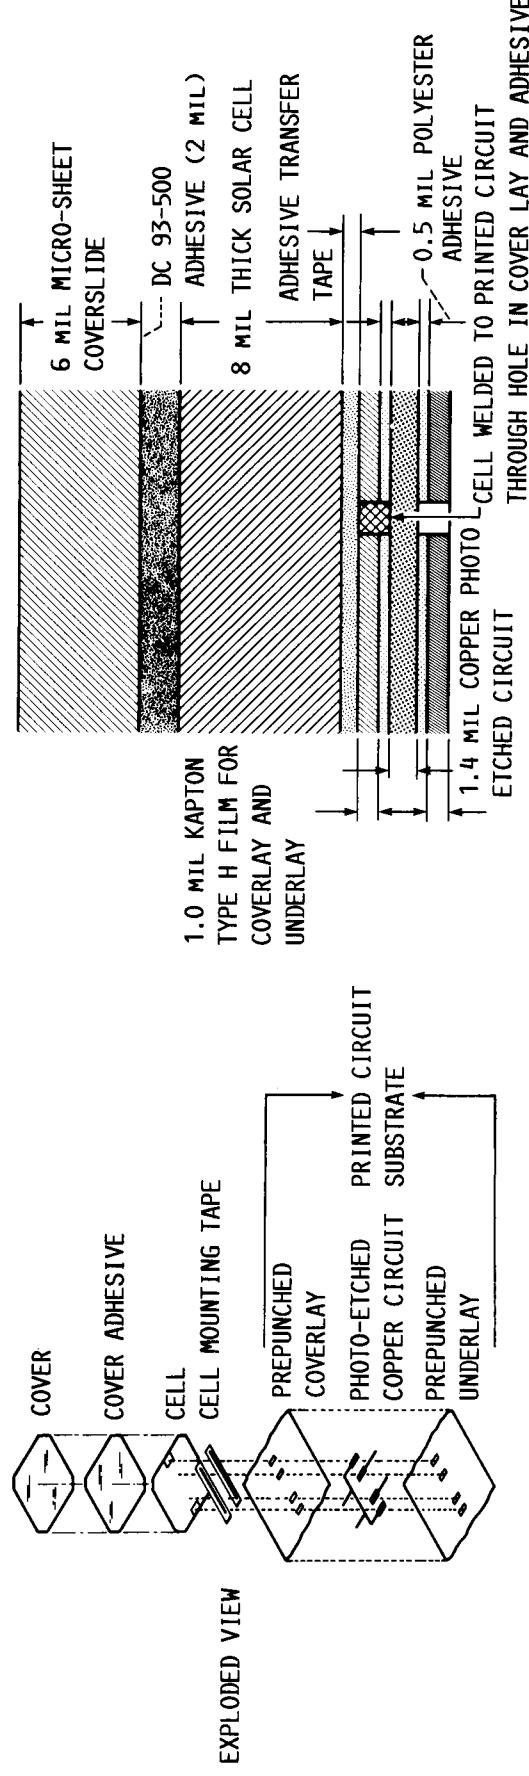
SOLAR CELL ATTACHMENT TO BLANKET - EXPLODED VIEW AND TYPICAL CROSS-SECTION.
